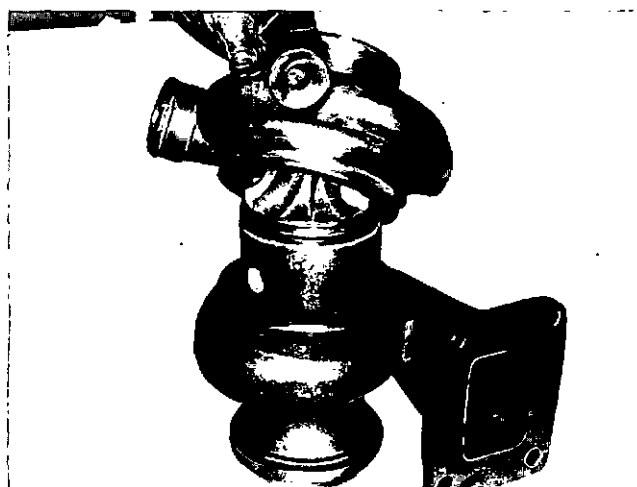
, (T359). Removing the compressor housing from the bearing housing
